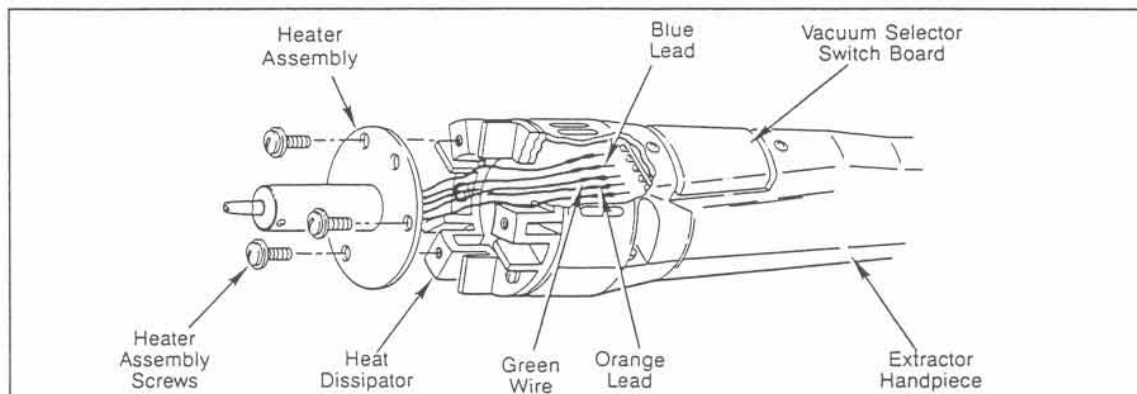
EXTRACTOR HANDPIECE HEATER ASSEMBLY REPLACEMENT
